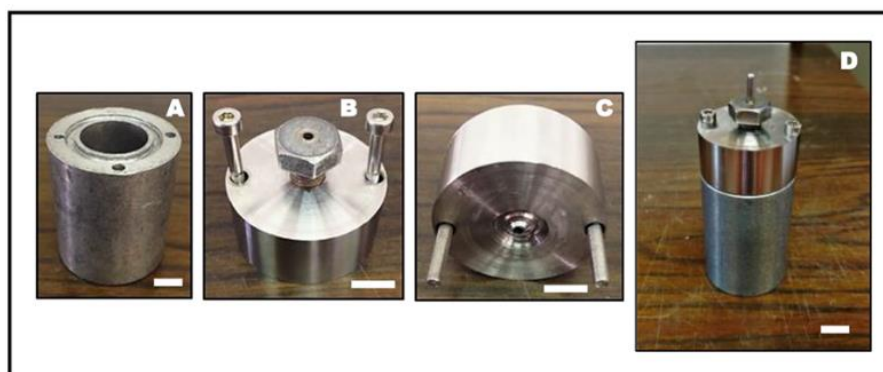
Aluminum sample holder for hollow cylindrical scaffold synthesis via TIPS: body (A), cover top view (B), cover bottom view (C); sample holder assembled (D). Scale bar 1 cm.
